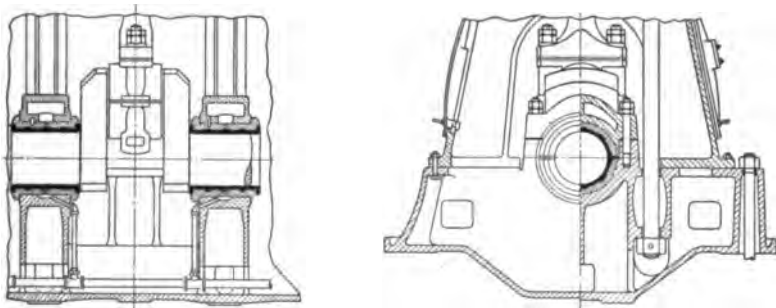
Busch-Sulzer Bros. Diesel main bearing.
